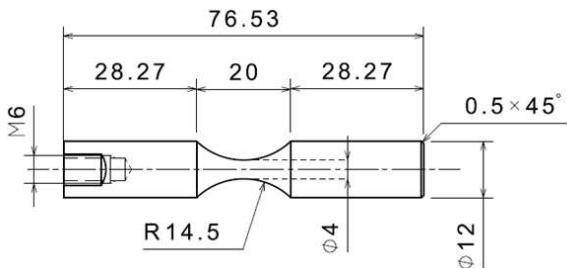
Geometry and dimensions of ultrasonic fatigue test specimen
